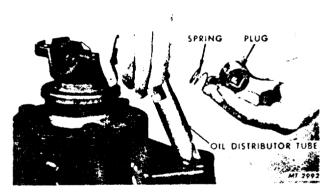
Removal of Plug, Spring and Gil Distributor Tube,
